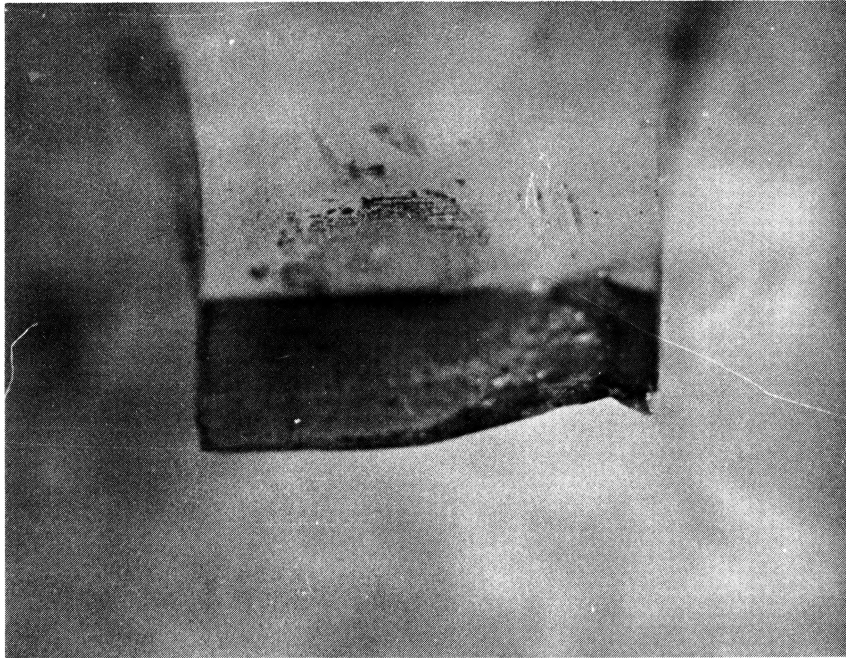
Fracture surface of martensite fretting fatigue specimen 4-41 (1,034,640 cycles).
